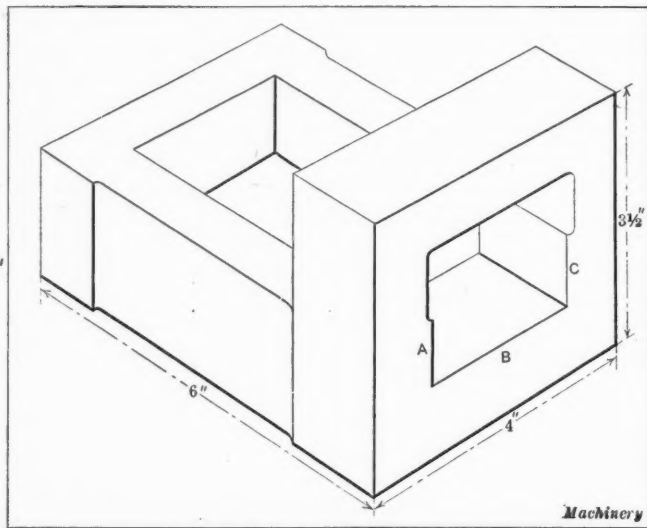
Jig Casting with Solid Bridge for Set-screw
